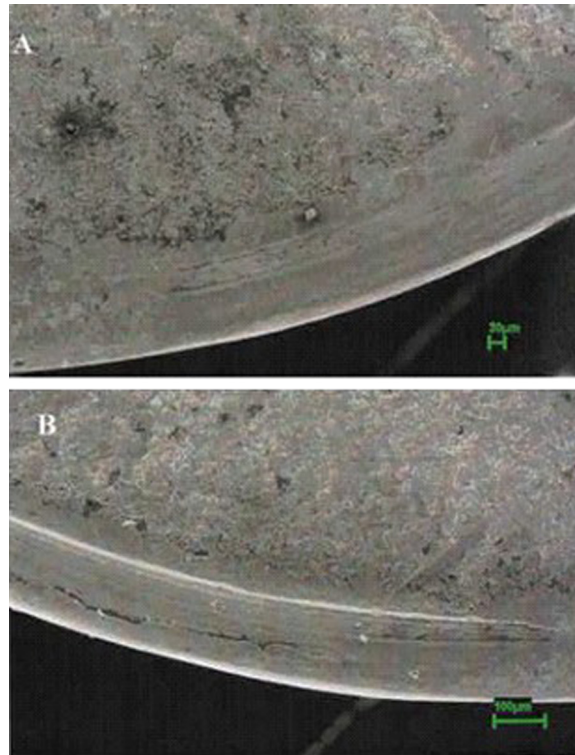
Machining scratches close to the fracture origin [26].
